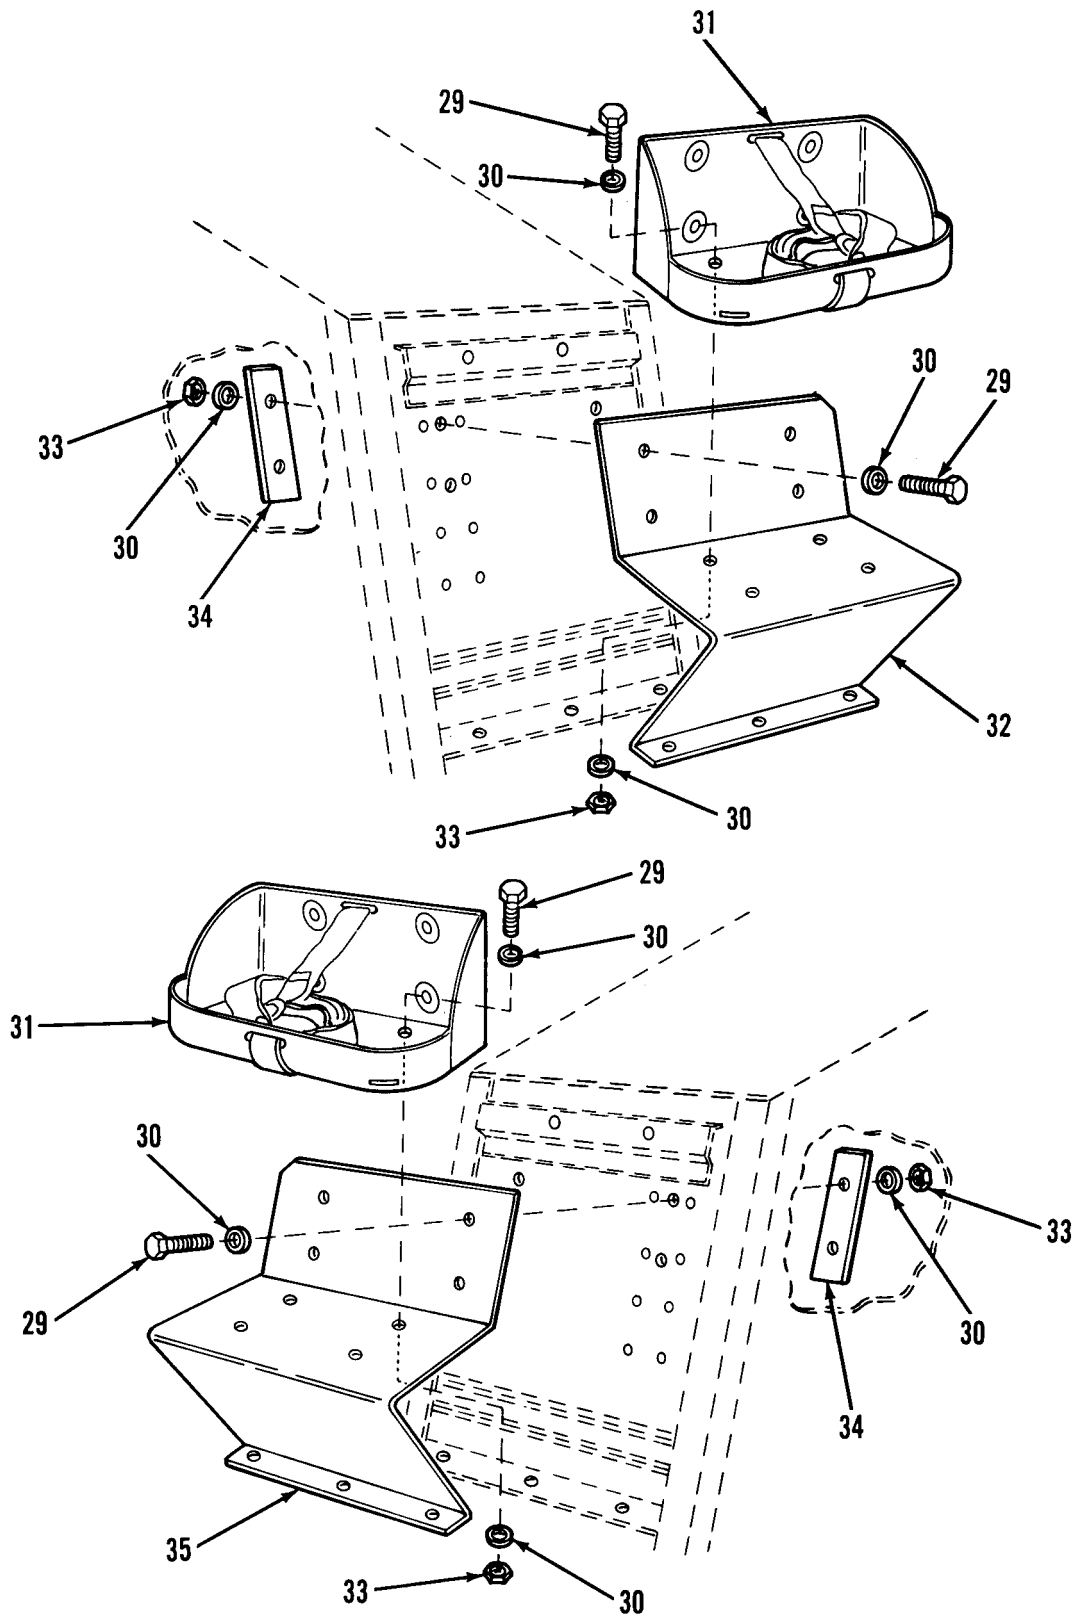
M288 Smoke Generator Mounting Kit, 31-15-2864 (Sheet 2 of 2)
